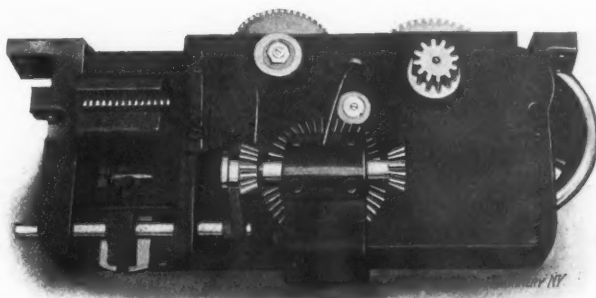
Rear View of Apron of Cincinnati Lathe & Tool Co.'s 16-inch Engine Lathe
